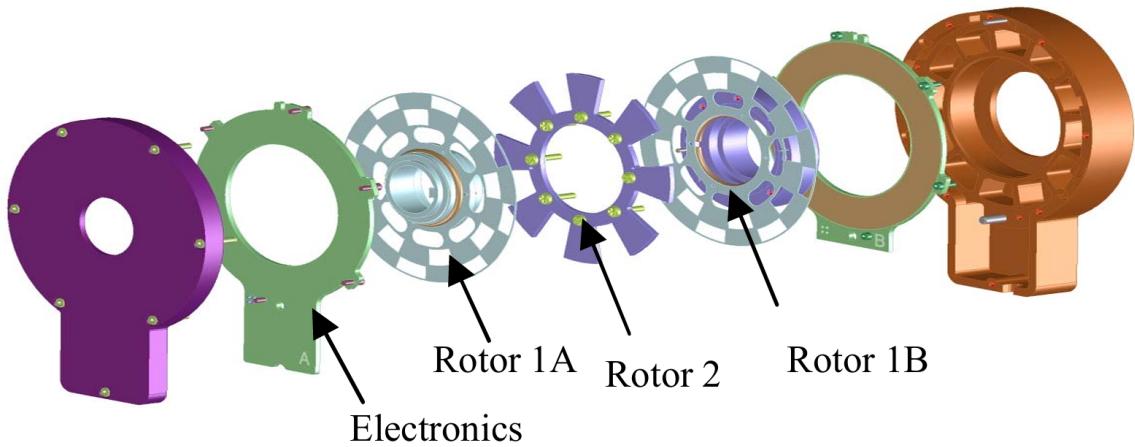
Exploded view of the differential capacitive torque sensor mechanical assembly.
